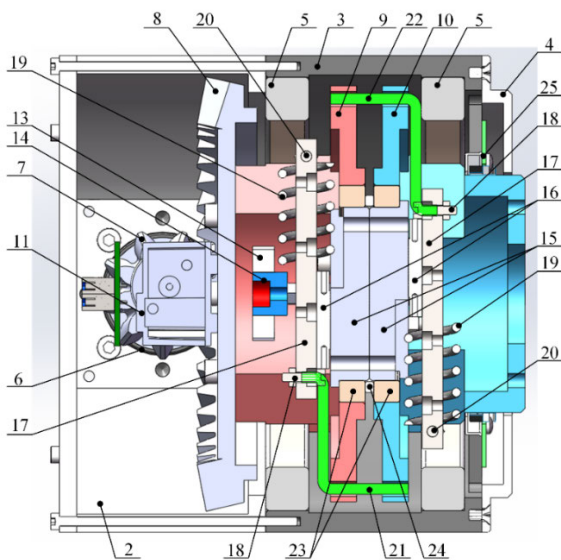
Sectional view along the A-A direction in Figure 11(a) : 13-driven gear, 14-transmission beam, 15-stiffness adjustment frames, 16-slider, 17-guide rail, 18-guide rail limit bolt, 19-spring, 20-spring limit bolt, 21-22: ropes, 23-small bearings, 24-ring, 25-encoder.
